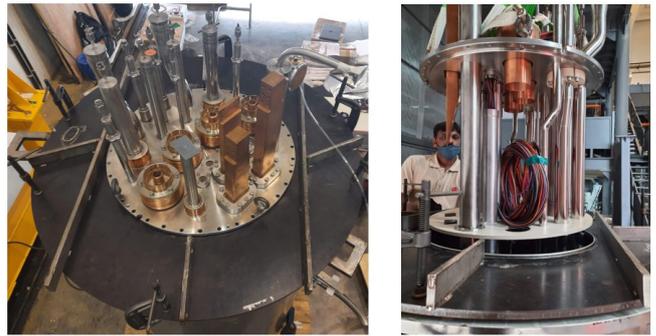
Multi feed thru dished head assembly for high voltage bushing.
